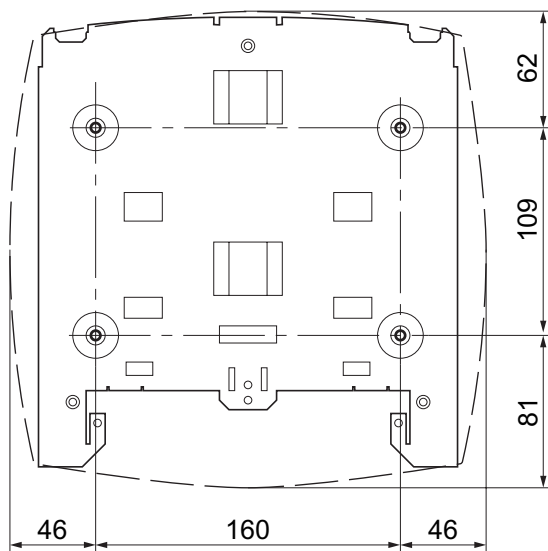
Drilling template for fitting the mounting plate to a wall
